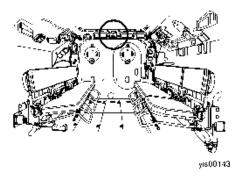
Flame Sensor Cables and Sensor Boxes (Rear).
